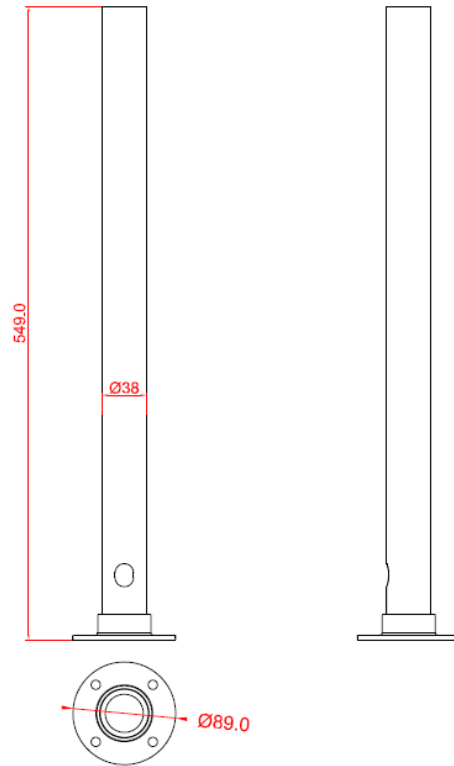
I-shaped vertical Mounting rod dimensions in mm
